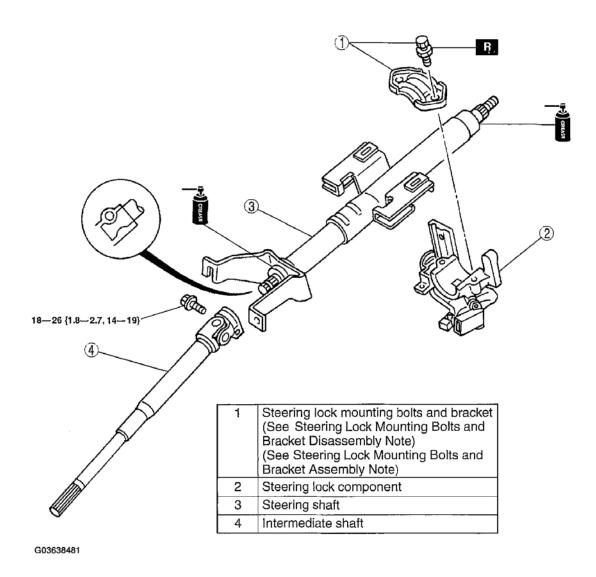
Disassembling Steering Shaft Courtesy of MAZDA MOTORS CORP.
